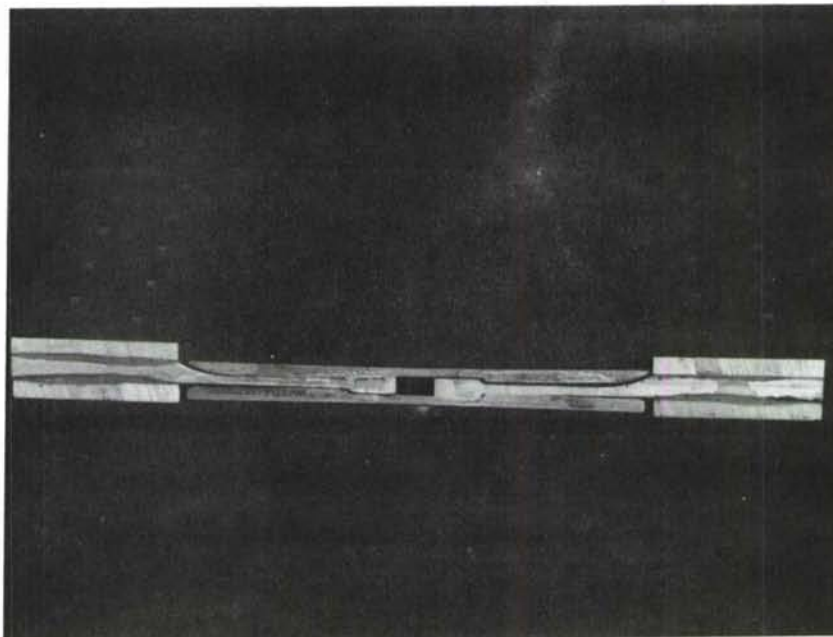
TEST ARRANGEMENT, SPANWISE SPLICE FAIL SAFE
